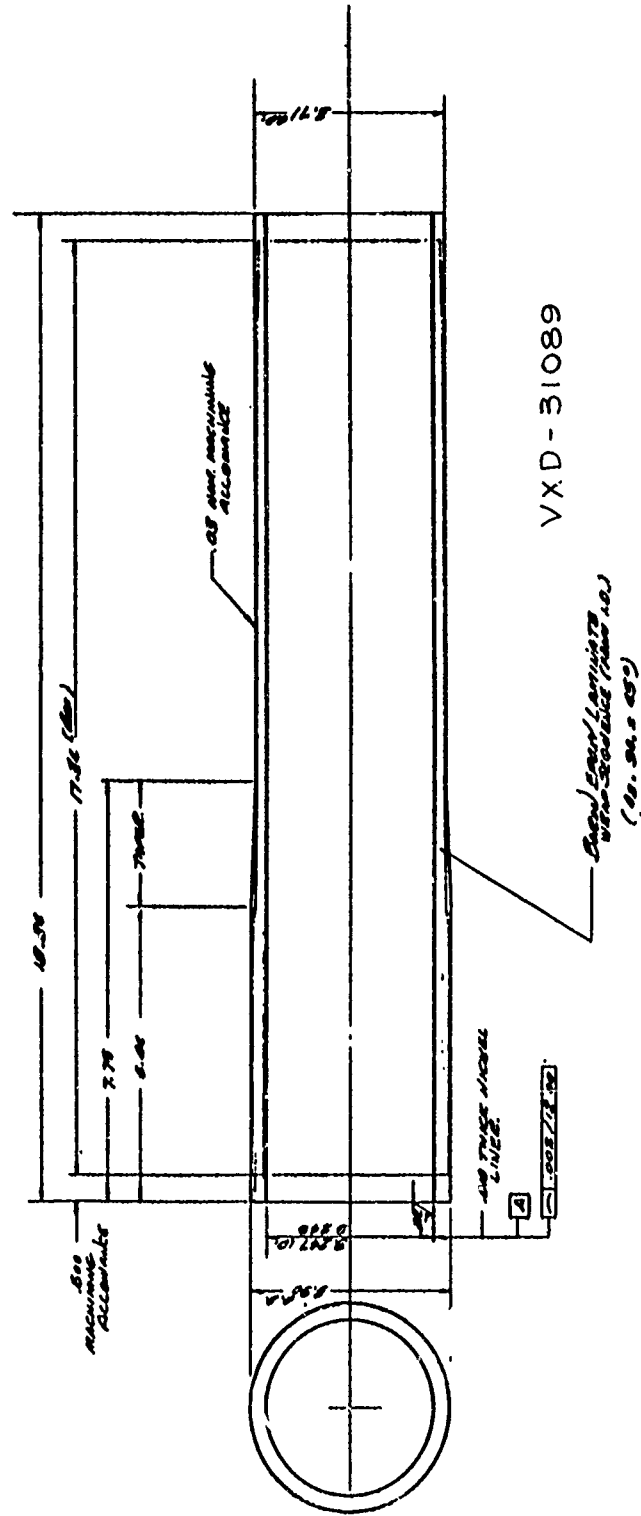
Boron-Epoxy Filament Composite Tube for Outer Cylinder Assembly
